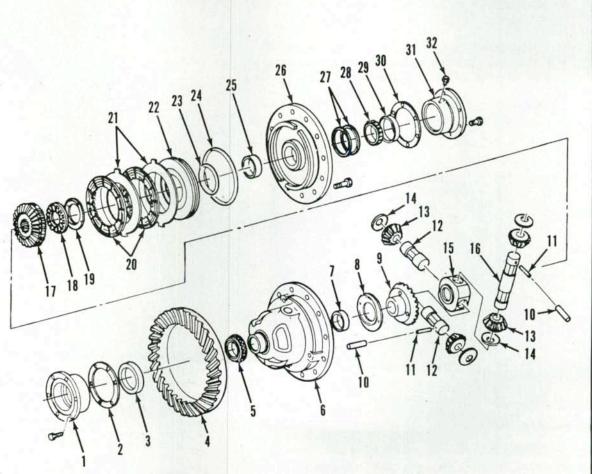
Exploded view of differential assembly. Fluid for operation of differential lock piston (22) enters right carrier bearing support through fitting (32) and is transmitted to cover (26) through a bore in hub of cover.
